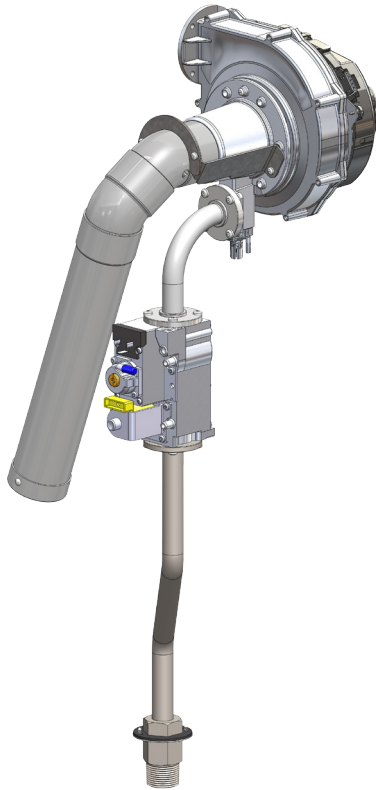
Prestige Solo 299-399 - Blower conversion kit - Assembled
